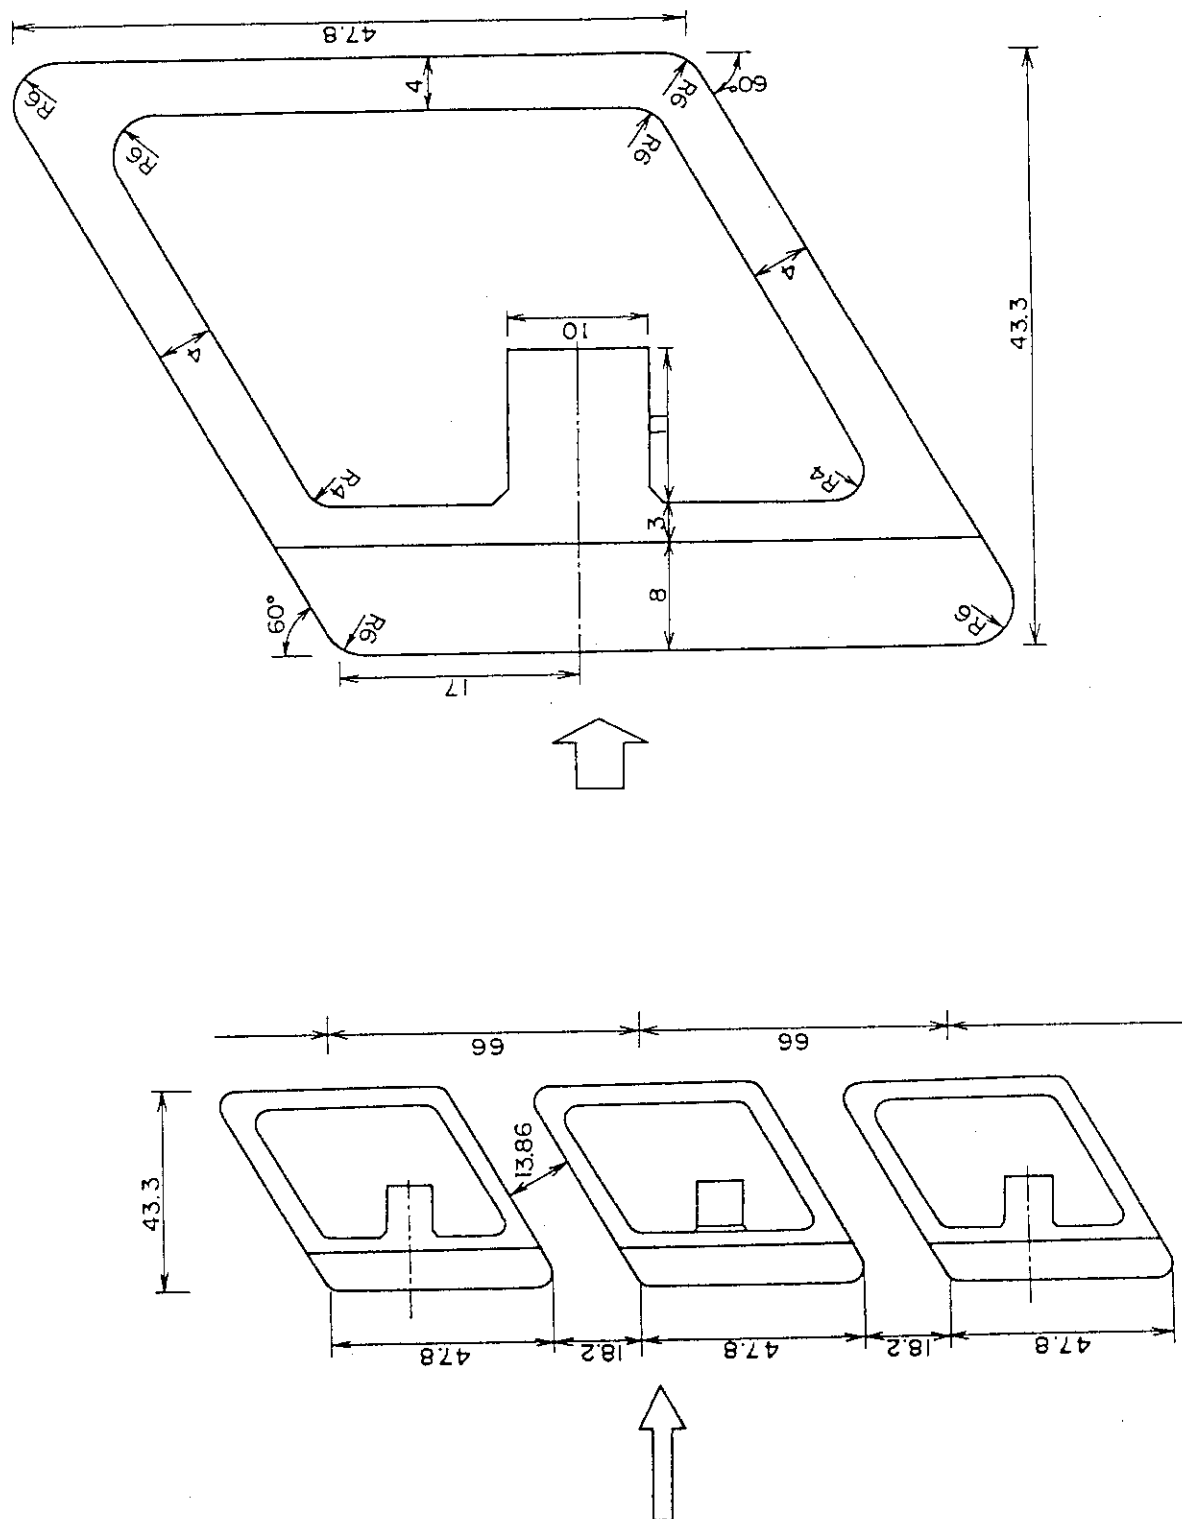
Cross-section and detailed dimensions of the Faraday shield.
